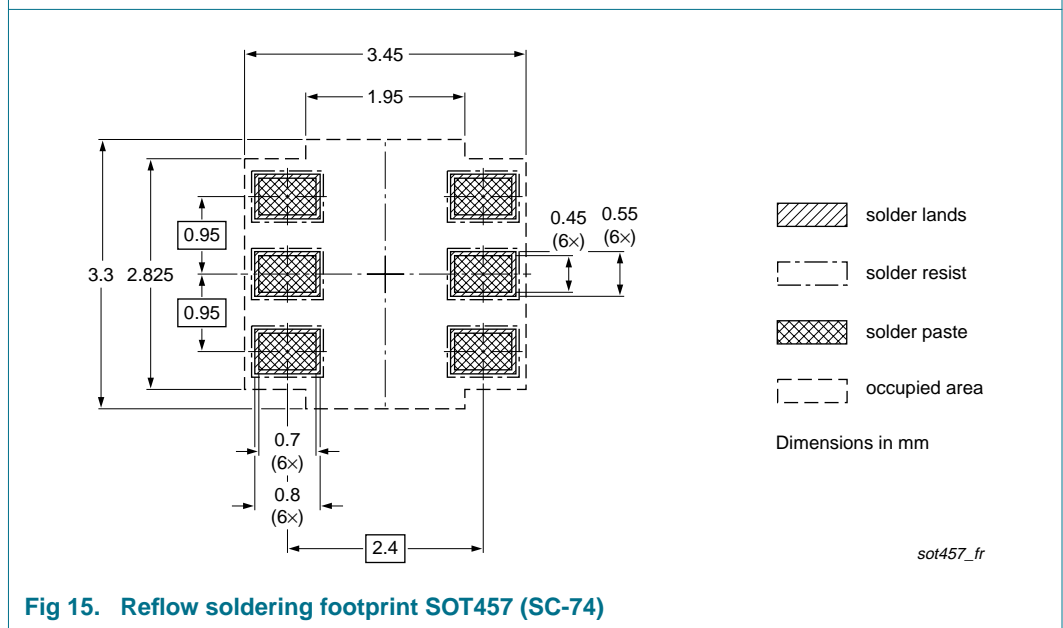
Reflow soldering footprint SOT457 (SC-74)
